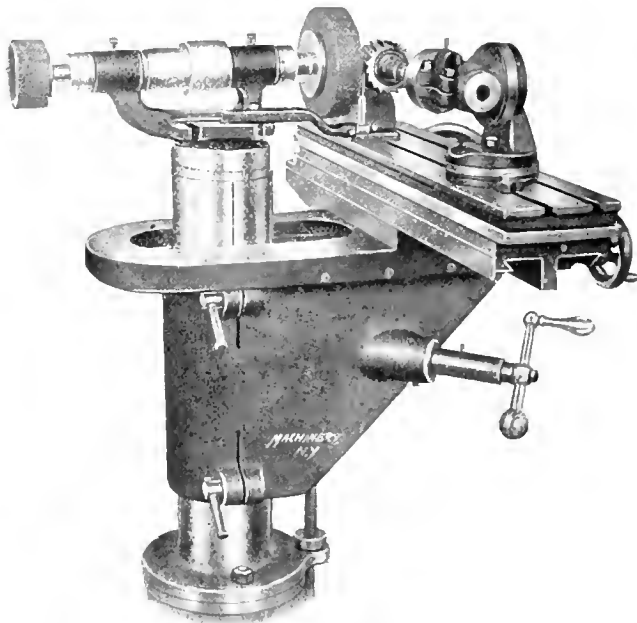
The Woods Cutter and Reamer Grinder, sharpening a Spiral Mill.
